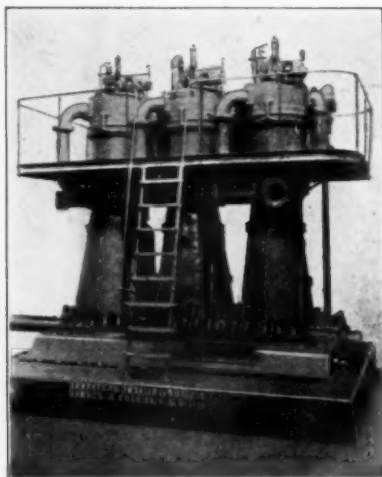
400-H.P. THREE-CYLINDER DIESEL ENGINE BUILT IN RUSSIA
